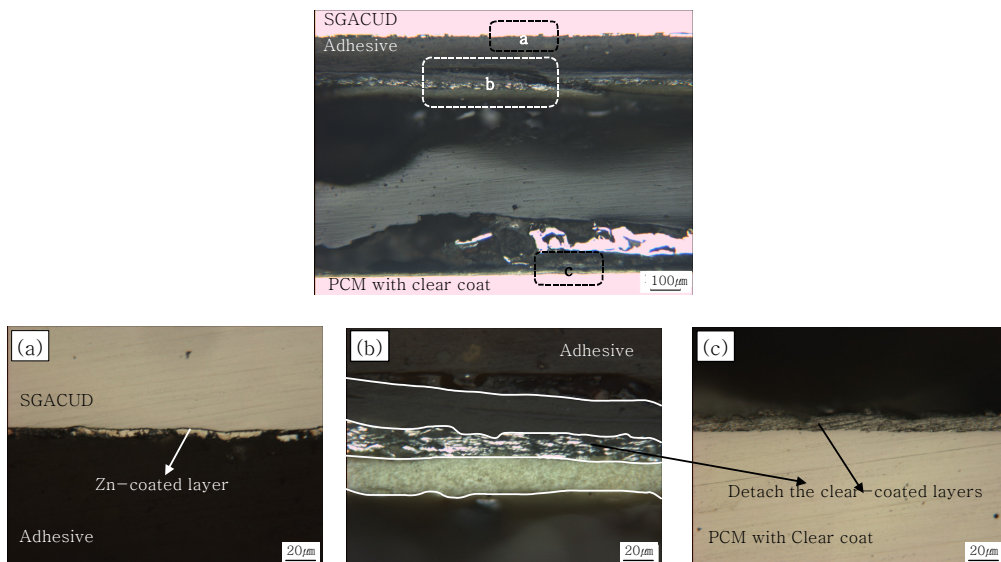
Fractography images showing the adhesive bonding of tensile failure joints of SGACUD+Clear coat
